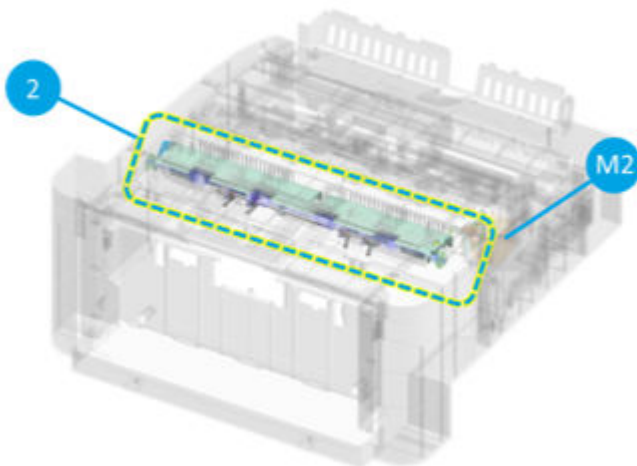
Inner finisher system - paddle unit driving system detail view (1 of 2)
